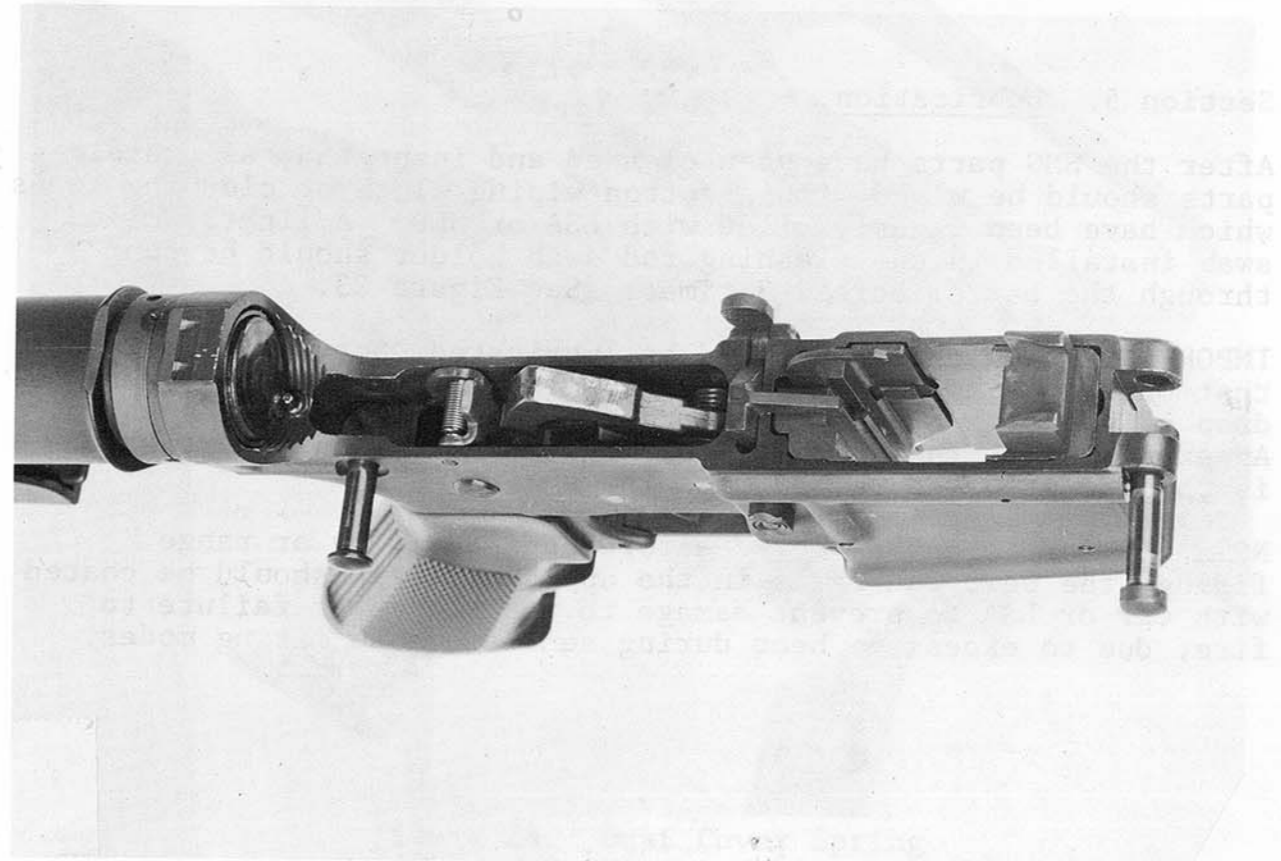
Lower Receiver Hammer assembly, ejector and showing magazine well
